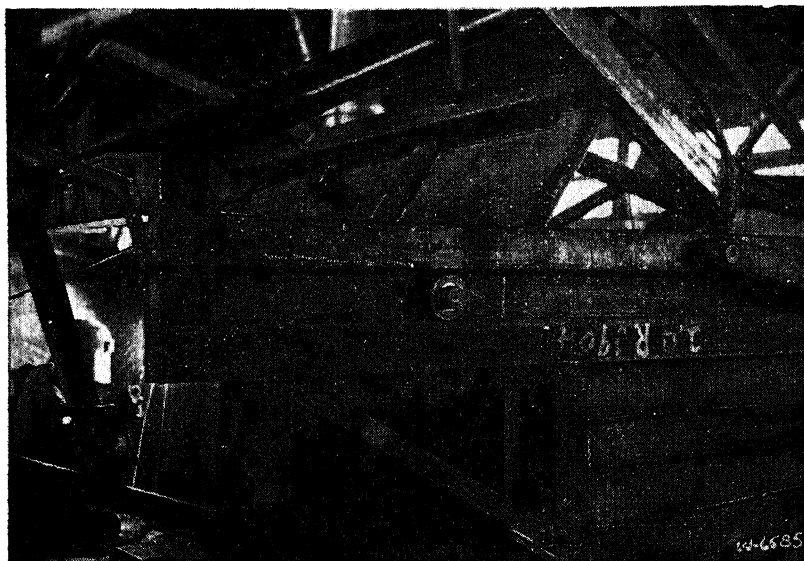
Assembly line view of a scraper such as shown in Fig. 1105. Box beam construction is used extensively.
